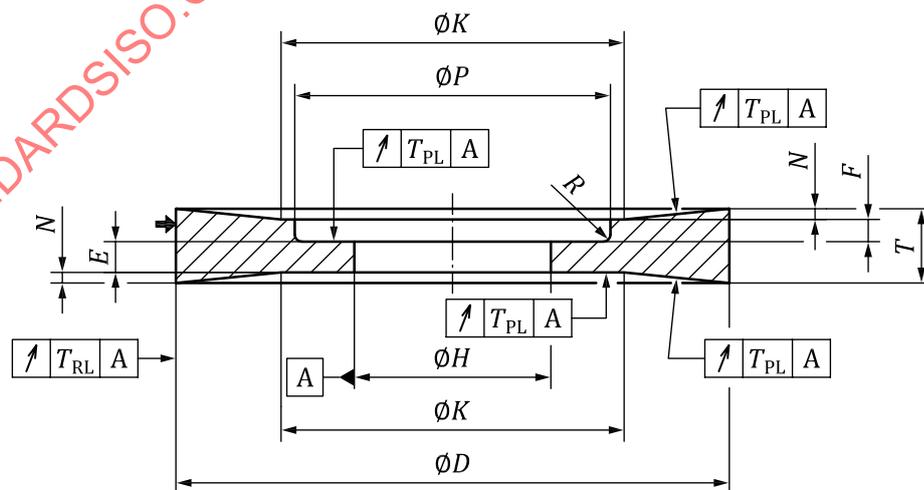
Grinding wheel, relieved and recessed on one side, relieved on the other side (Type 25)
